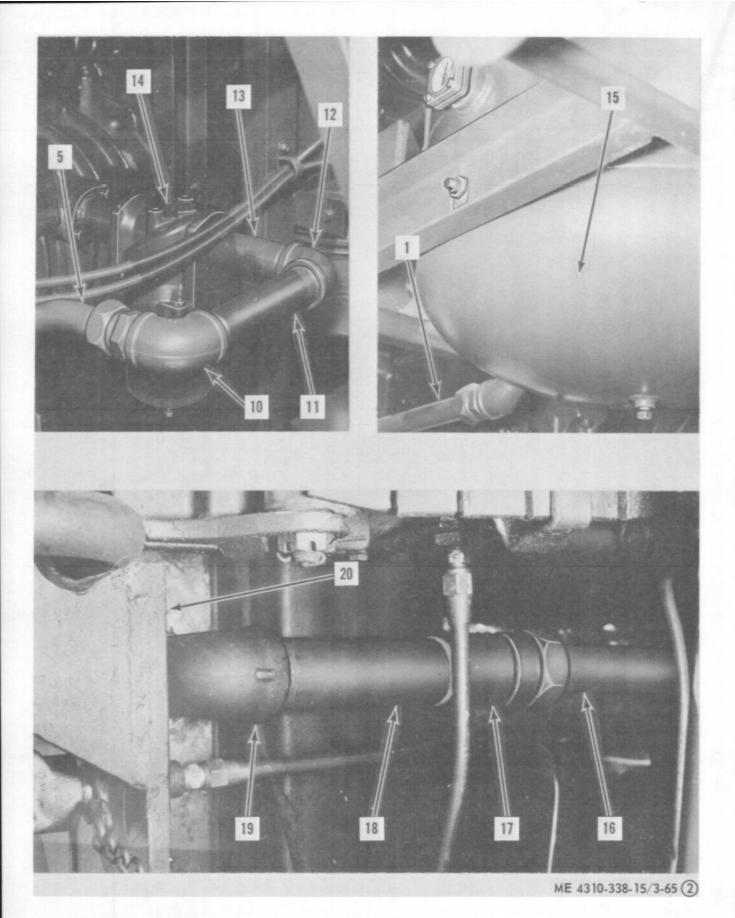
Compressor oil lines and fittings, removal and installation (sheet 2 of 3).
